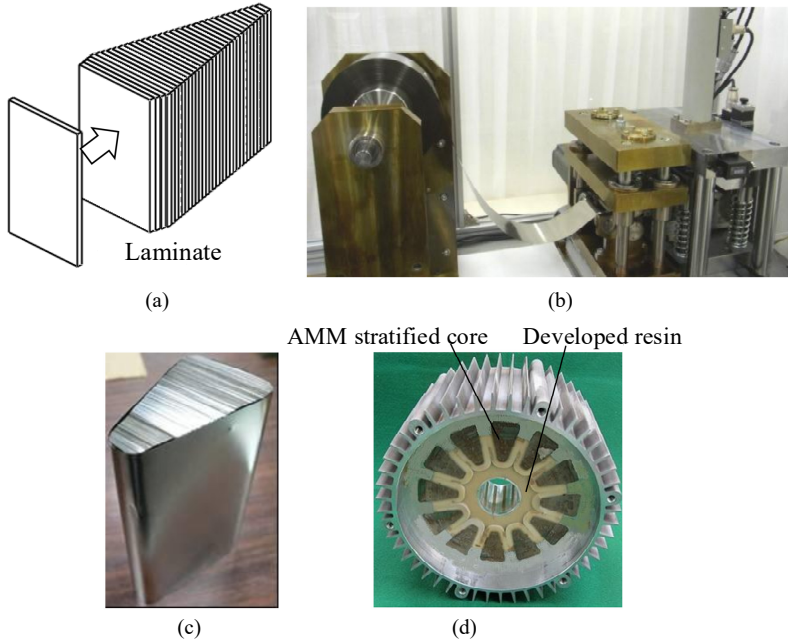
Manufacturing of an axial-flux AMM stator by Hitachi [113]. (a) Lamination of AMM core. (b) Manufacturing equipment. (c) AMM stratified core. (d) Prototype of 11 kW at 3,000 /min.
